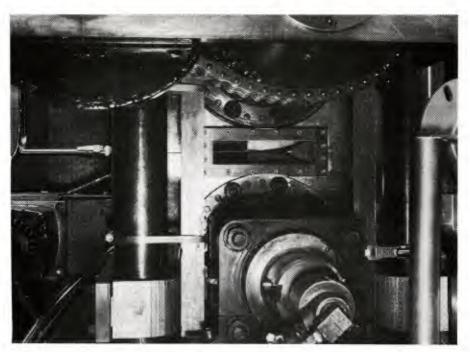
Set-Up for Compressor Blade Roll Forging (Side View) (#77-2118)
